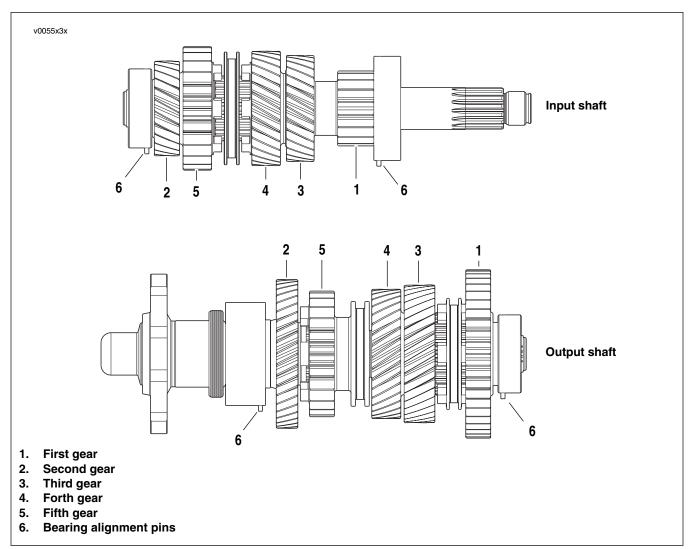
Transmission Input Shaft and Output Shaft Assemblies
